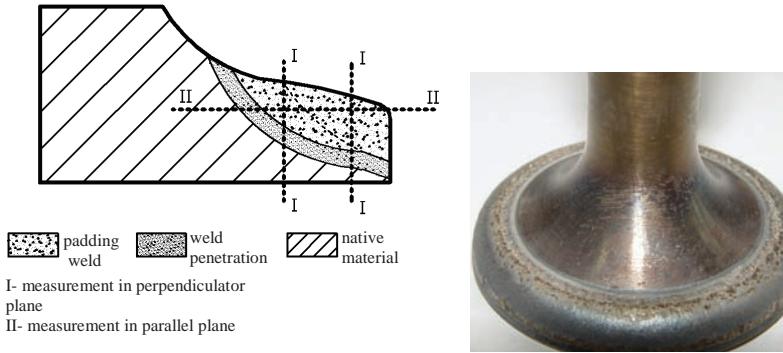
An W-46 engine valve that was laser pad welded with stellite: a) - a cross-section of the valve fragment with microhardness measurement planes marked; b) - an image of the valve after pad welding
